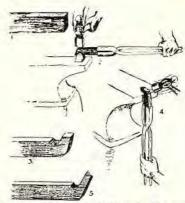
Steps in making a lathe tool. The work hould be done during one heat.
